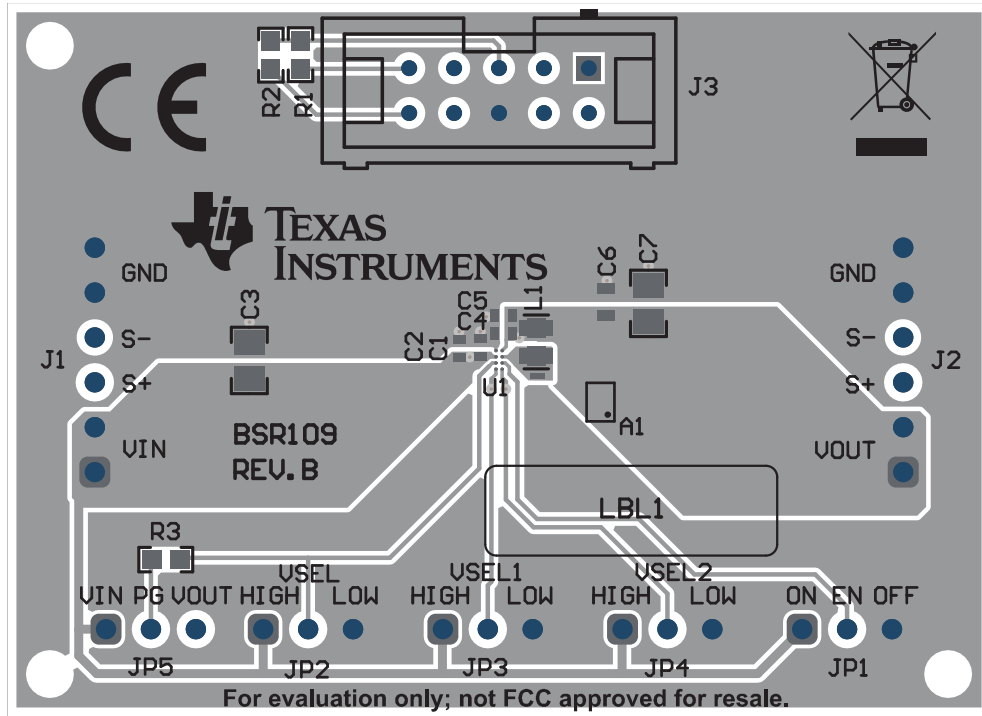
TPS6286x1EVM PCB - Assembly Layer
